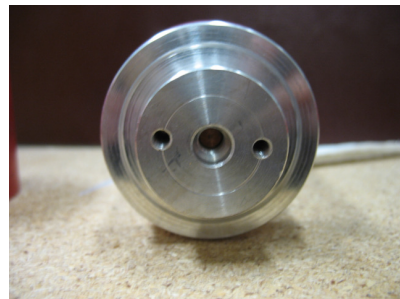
Rear view of large target mount. The centered M6 thread is used to fix the target with the copper holder. The two small M3 threads are used to safely store the mount with target and compensate pressure upon evacuation.
